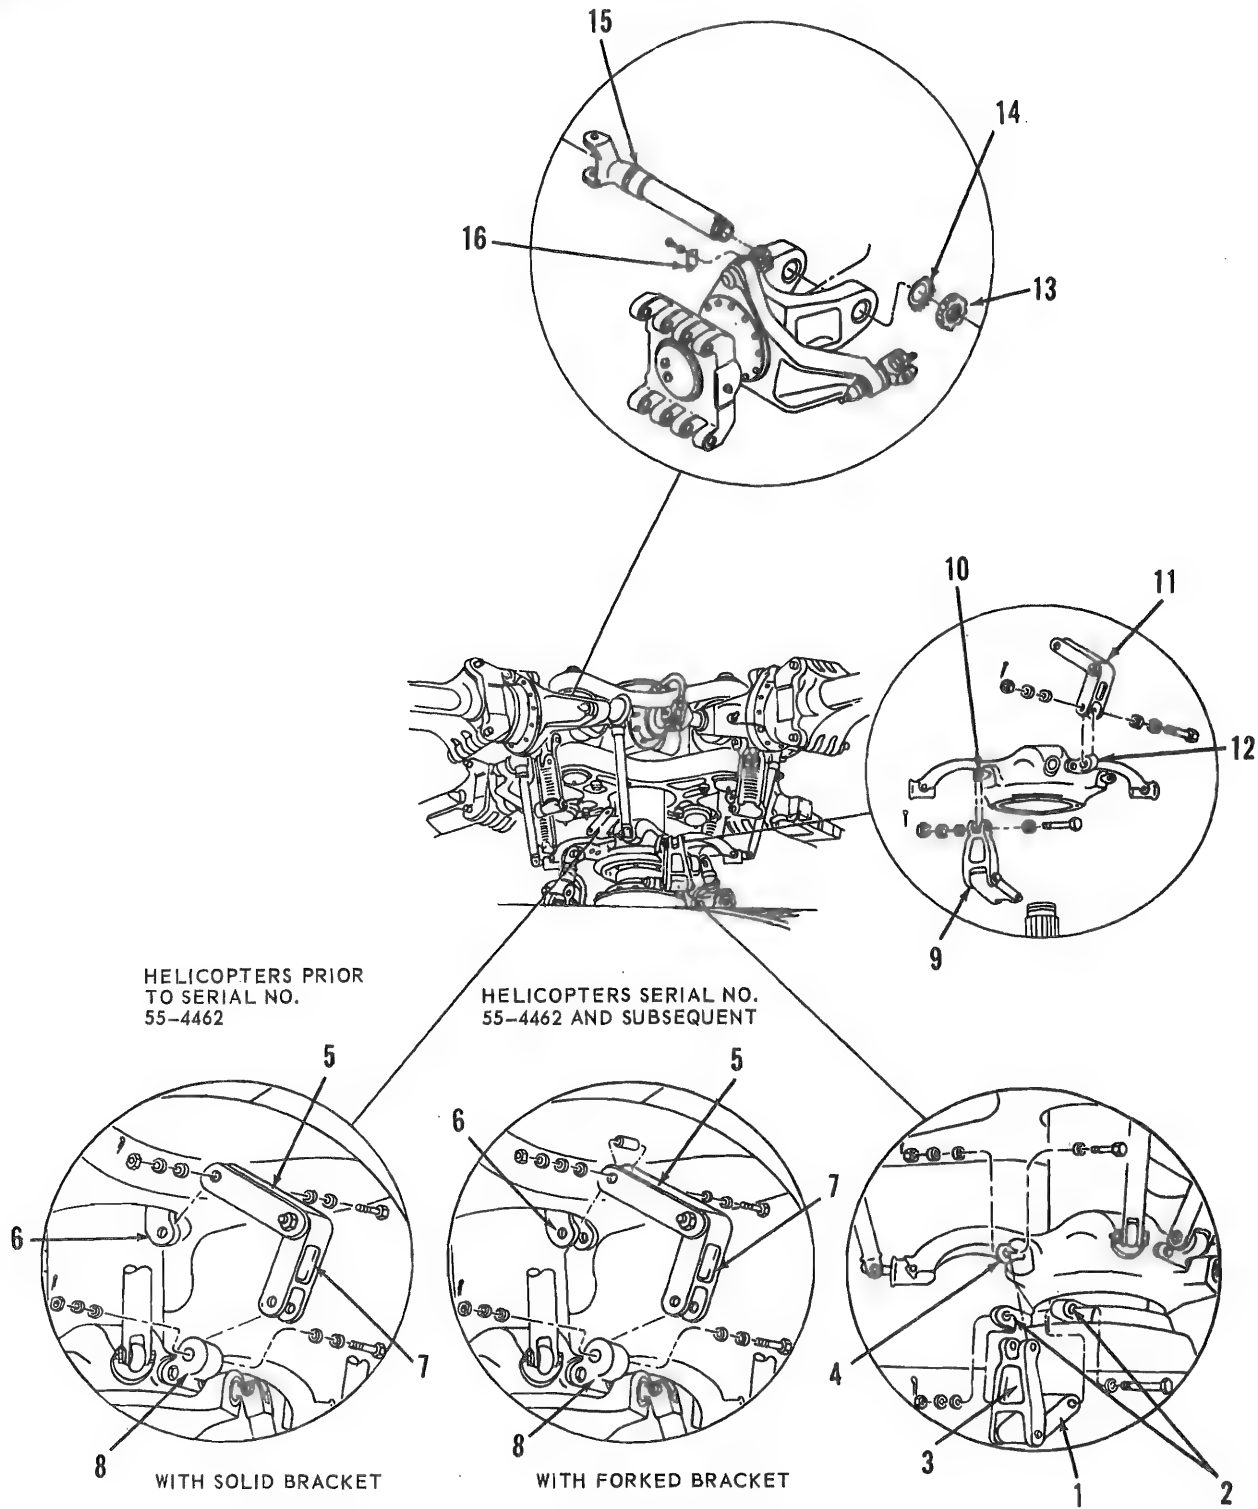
Removal of Main Rotor Head Assembly Components (Sheet 1 of 2)
